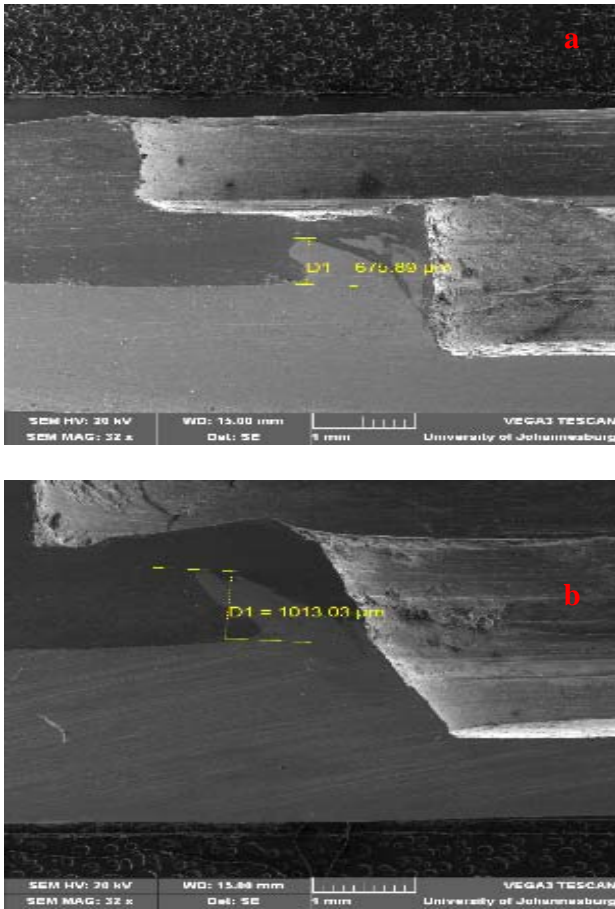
Depicts the copper ring length of the spot weld produced using 1200 rpm rotational speed and 1 mm shoulder plunge depth (a) flat pin/flat shoulder tool and (b) conical pin/concave shoulder tool.
